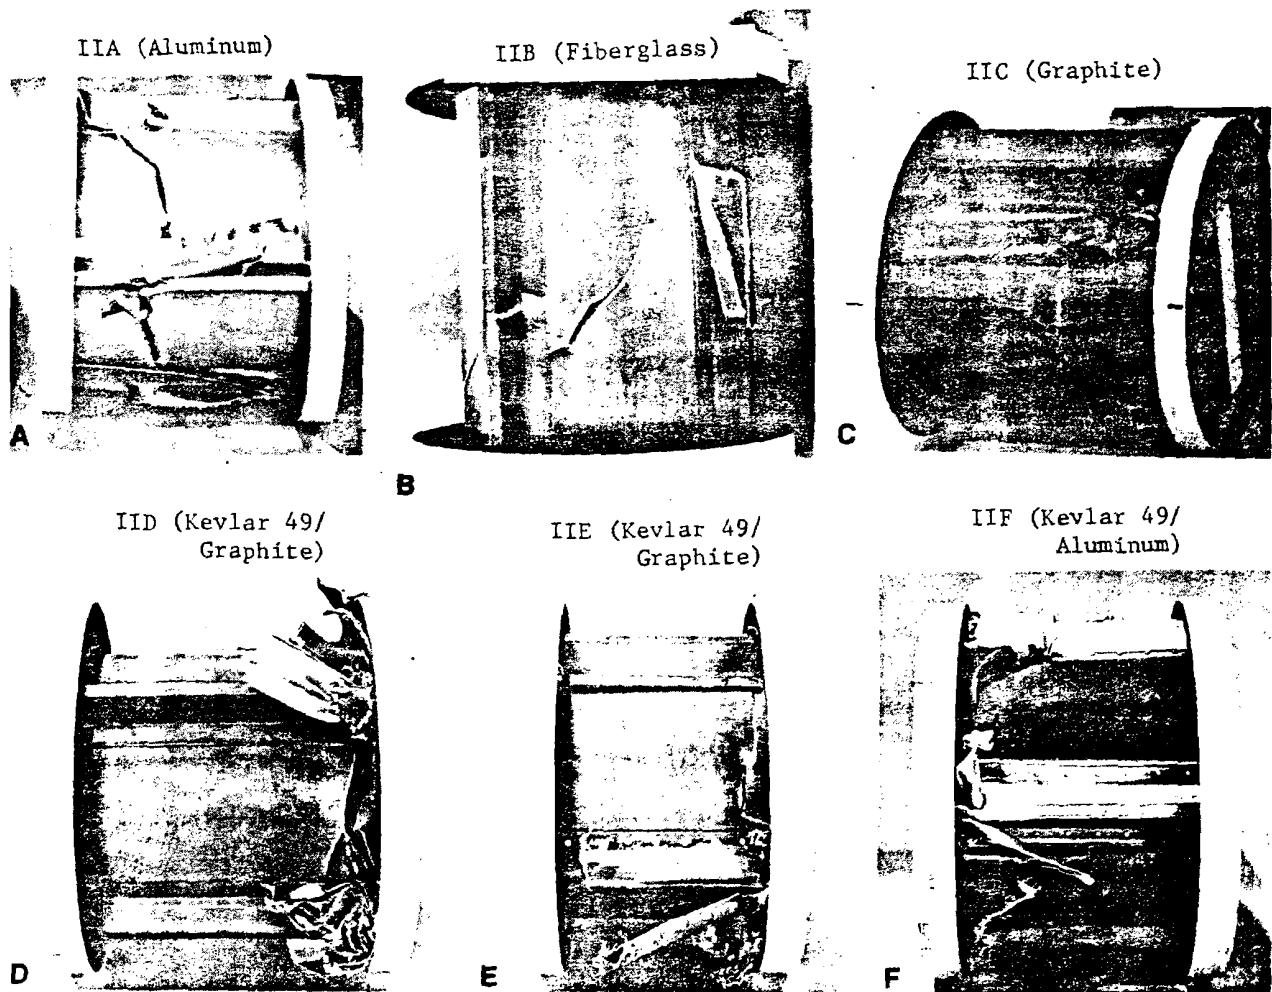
Externally Stiffened Specimens After Failure (Ref. 25)
